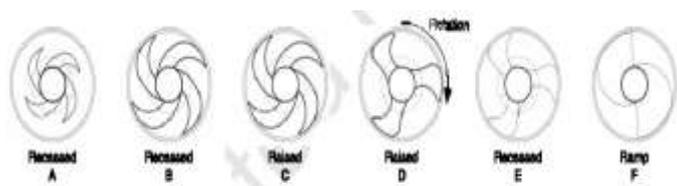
Schematic diagram of the six-unique tool shoulder geometry [23]
